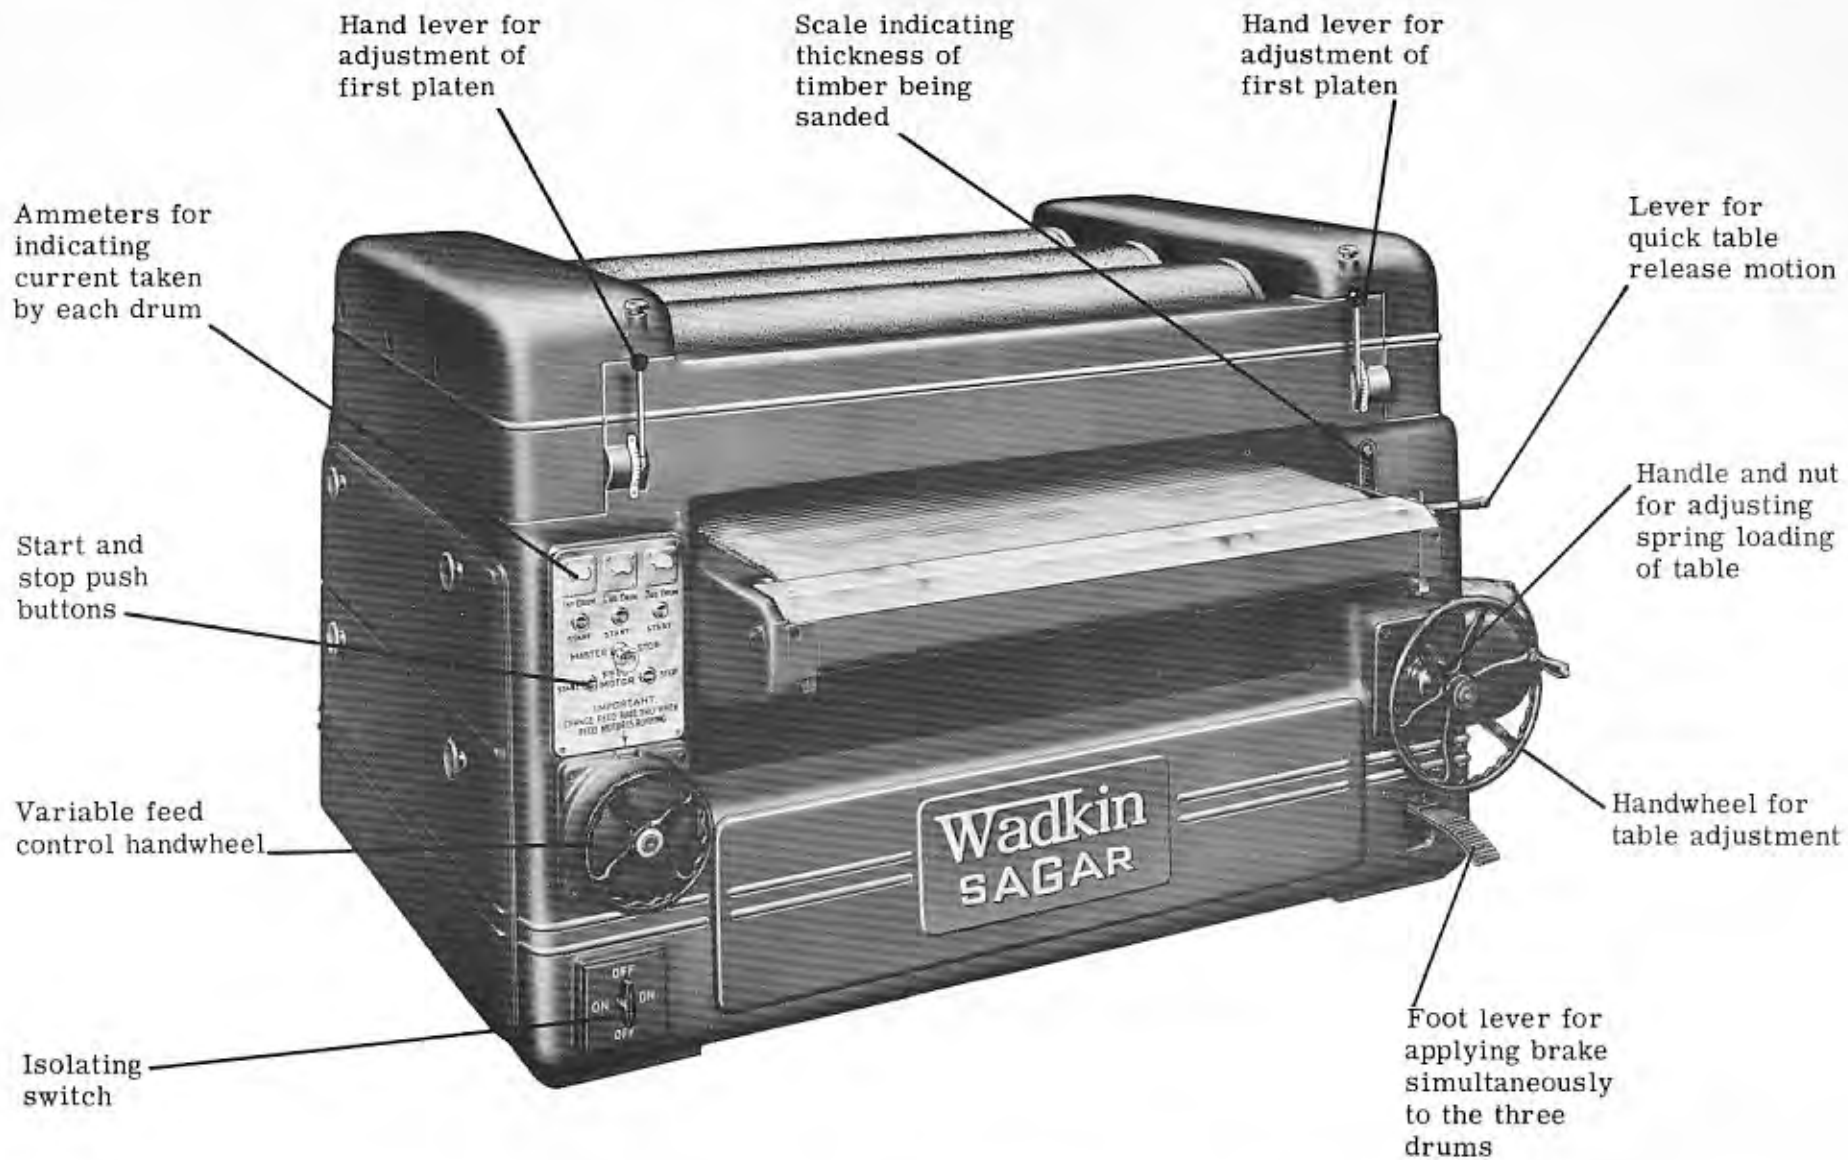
GENERAL VIEW OF MACHINE WITHOUT EXHAUST HOOD
